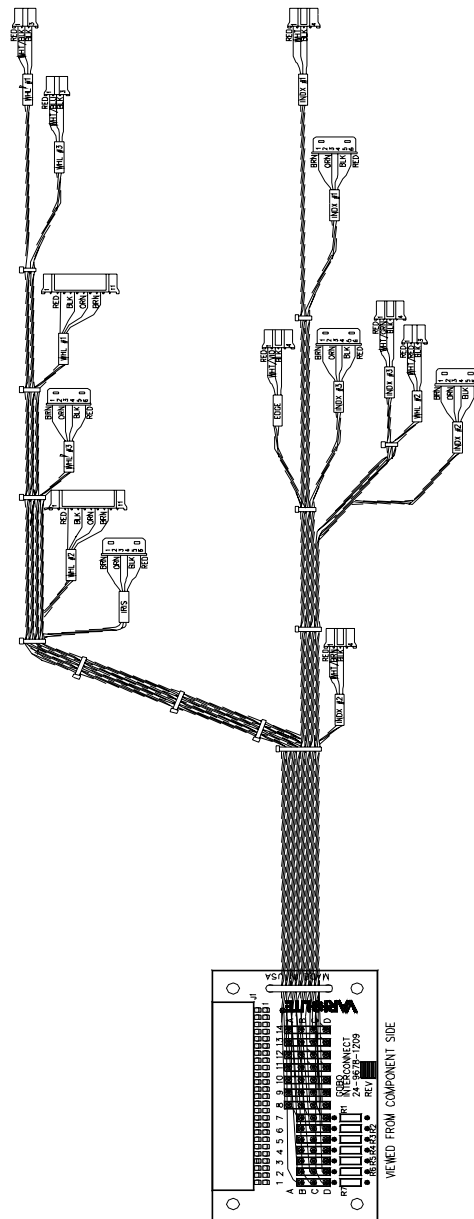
Gobo Interconnect PCB/Cable Assembly
